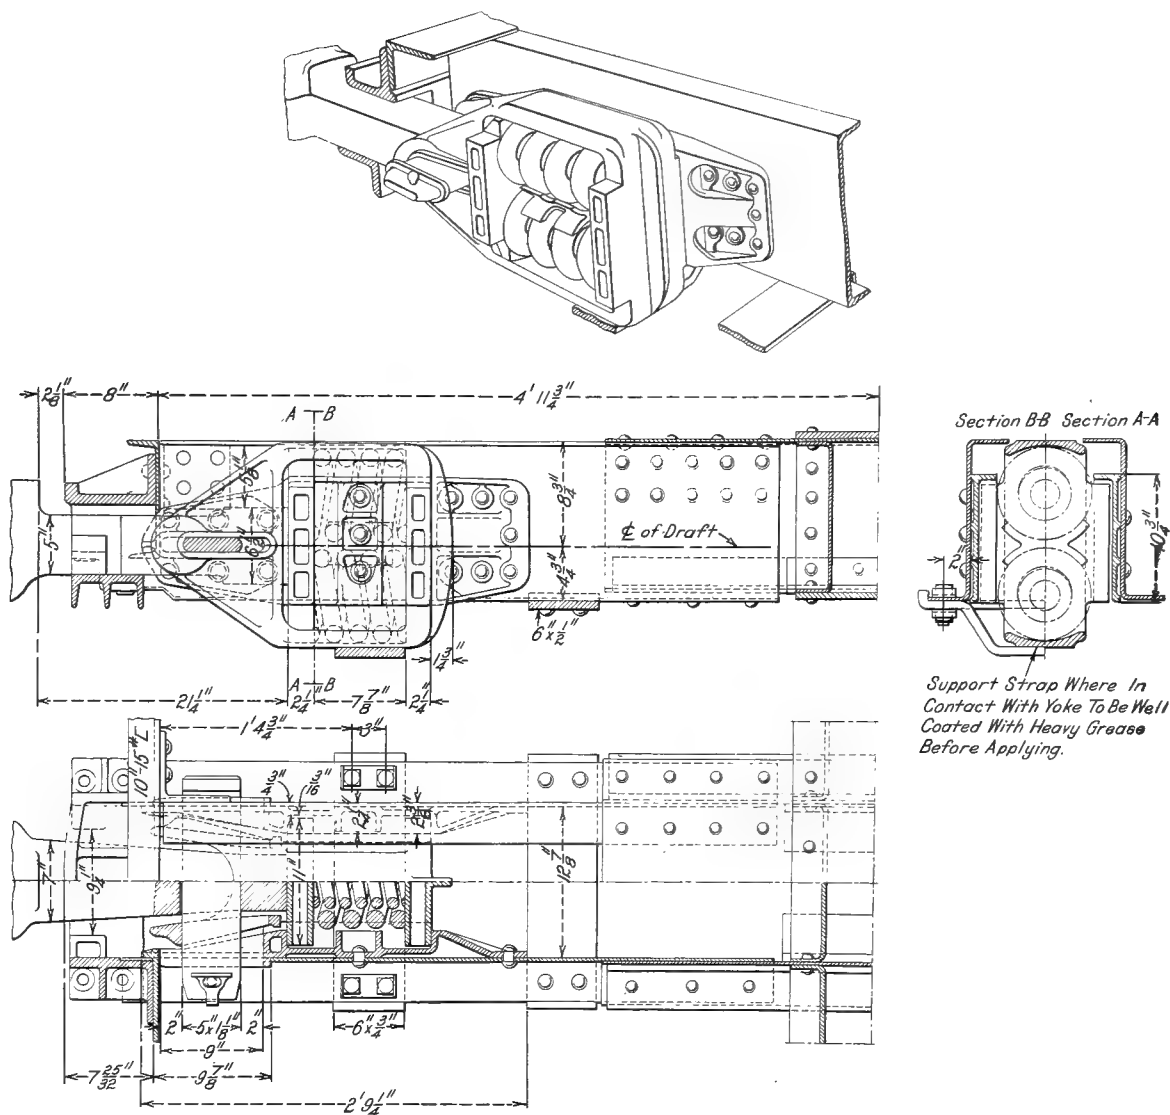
Universal Attachments and Yoke for Twin Spring Draft Gear. Universal Draft Gear Attachment Company.
